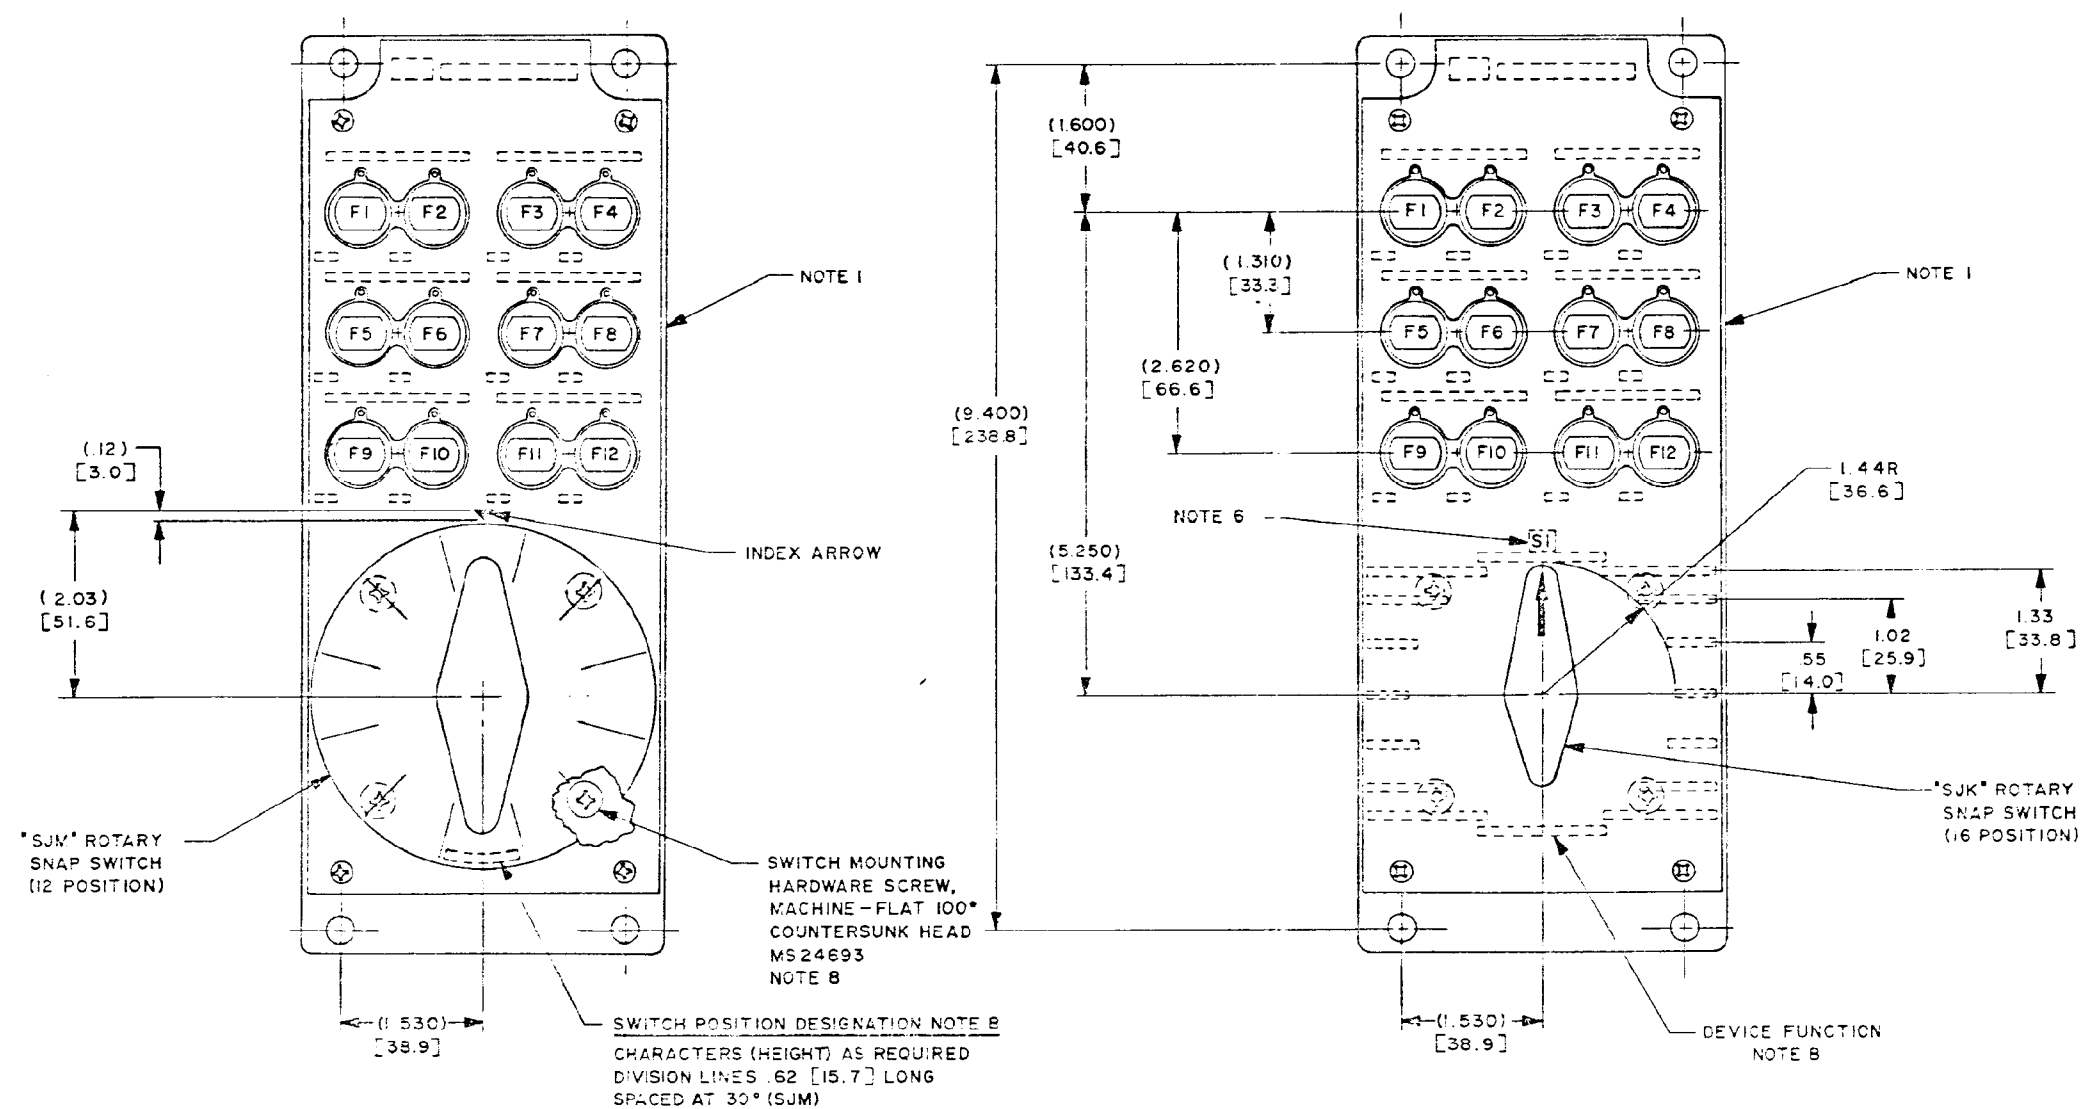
Switch and fuse panel assembly (sheet 2).
